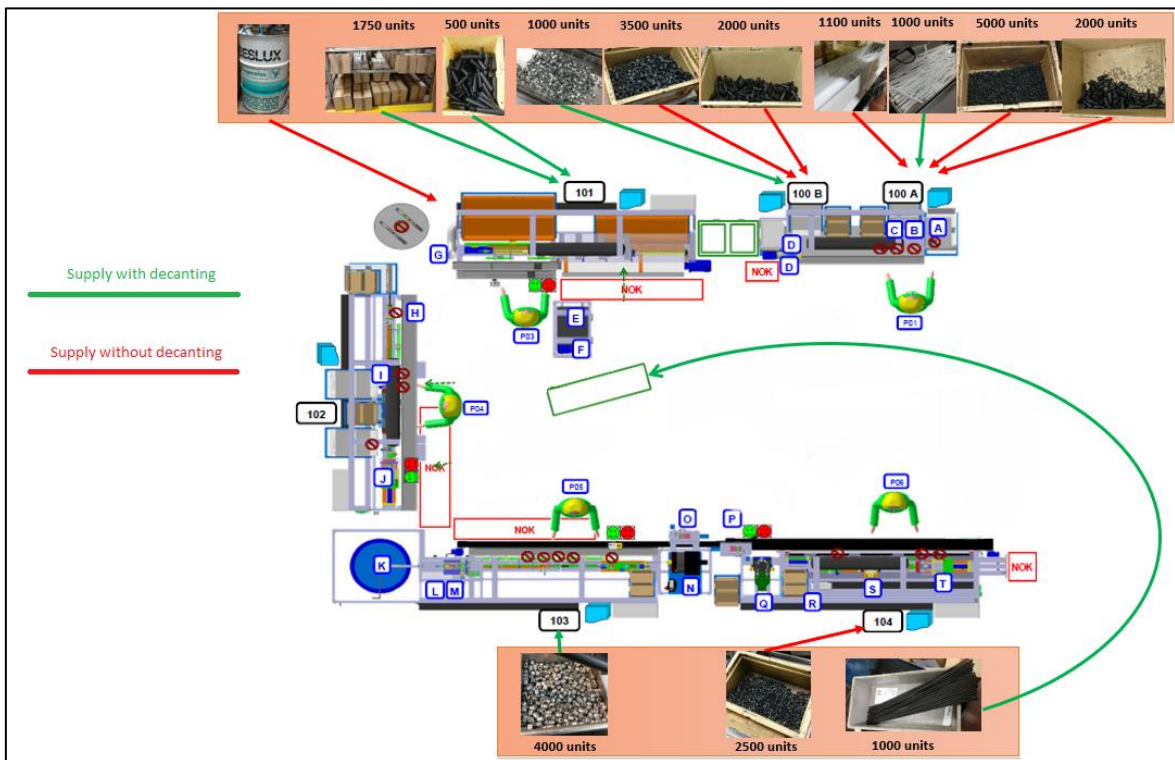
Components supply process to the assembly line 'PSA Travão'
